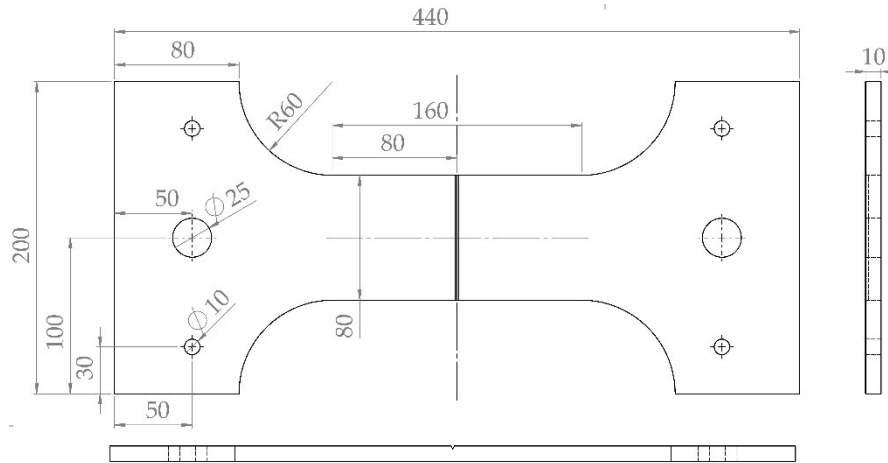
Dimensions of the 304 stainless-steel specimens
